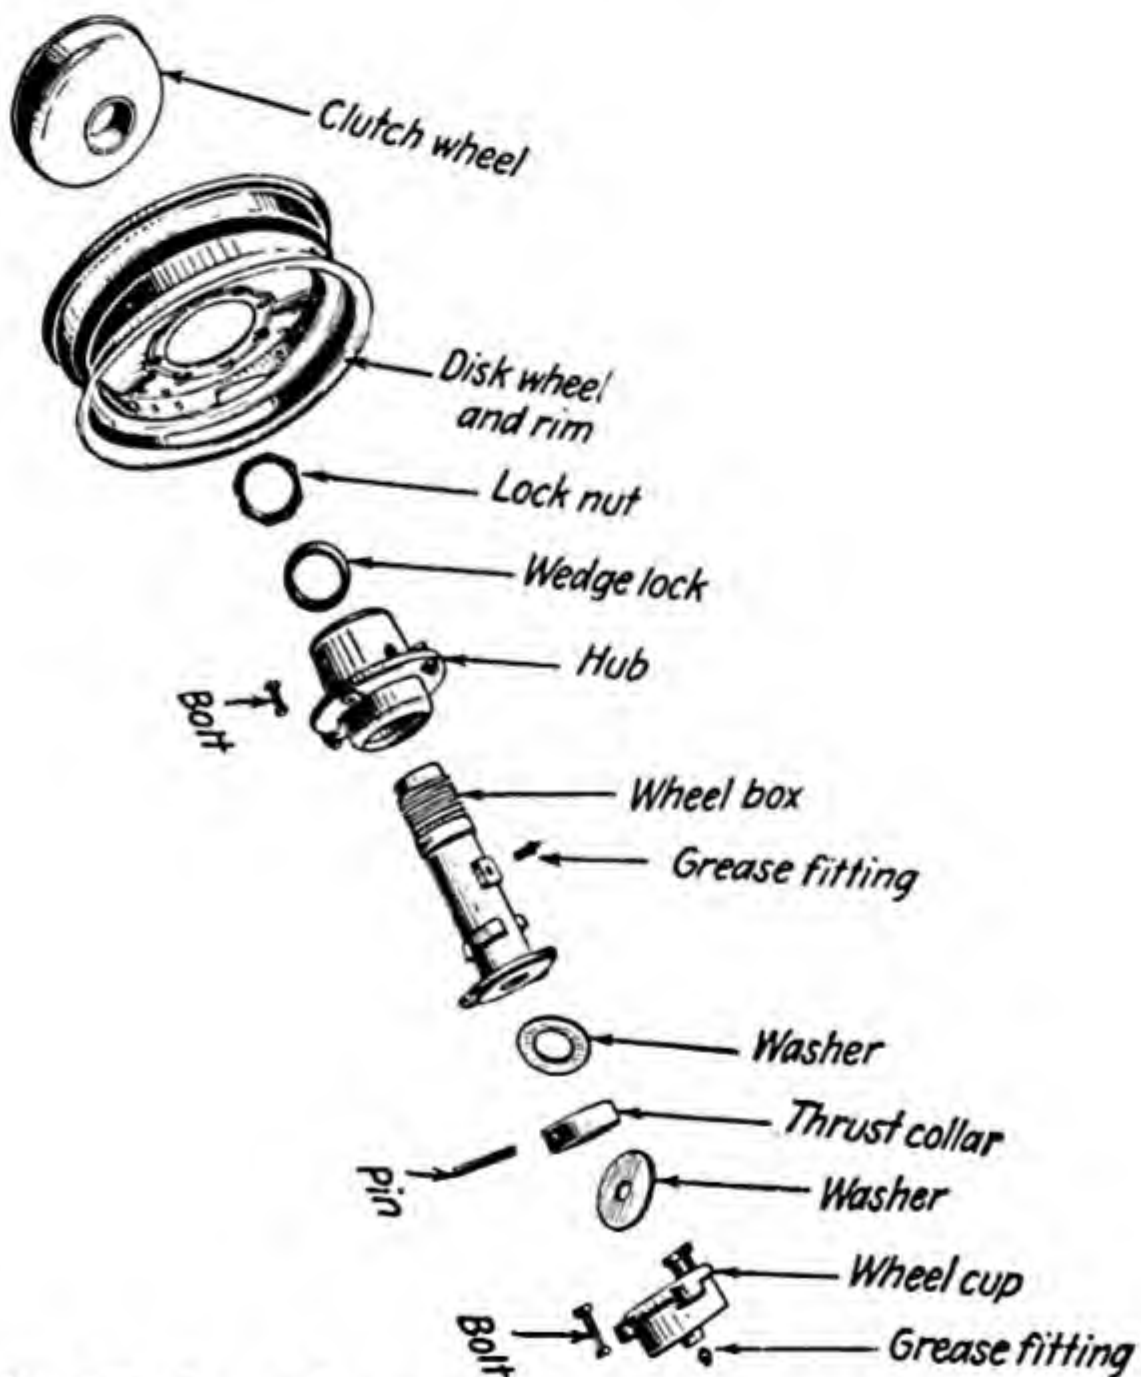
Wheel parts for pneumatic tire for land and furrow wheel of plow.
